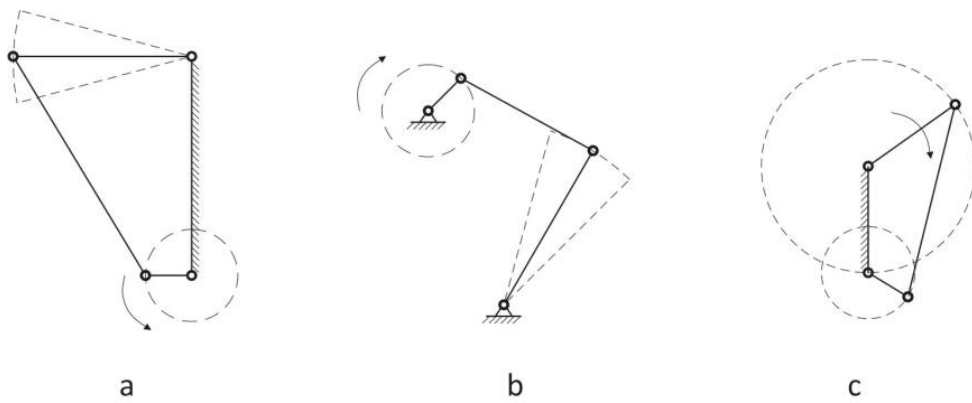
Articulated mechanisms a) centric crank rocker mechanism, b) crank rocker mechanism, c) double crank mechanism
